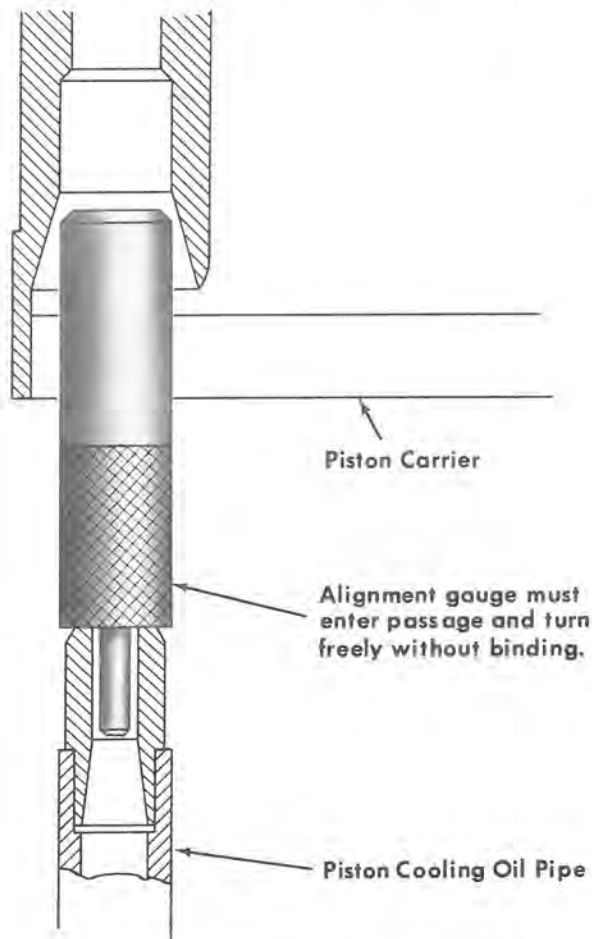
Piston Cooling Oil Pipe Alignment
